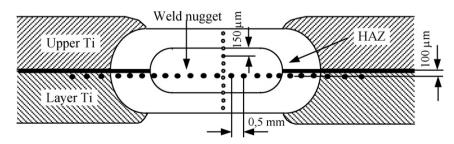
Hardness measurement areas on the welded sample.
